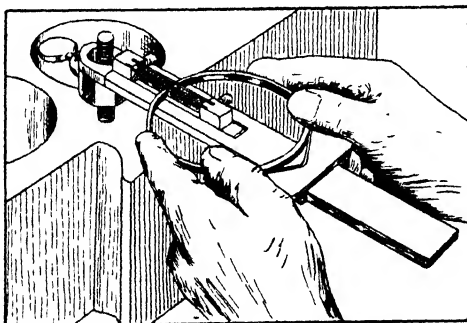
A Useful Device for Filing the Ends of Piston Rings.
